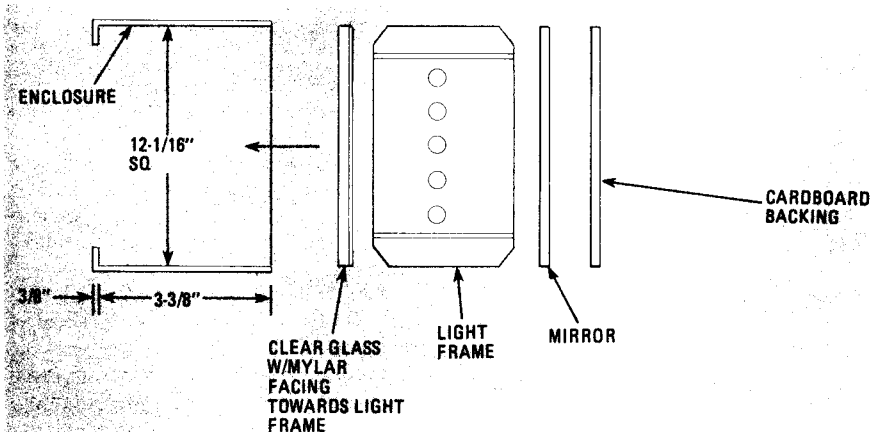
EXPLODED VIEW of infinity mirror. A small notch will have to be cut or filed in the case to pass lines for lamps.
